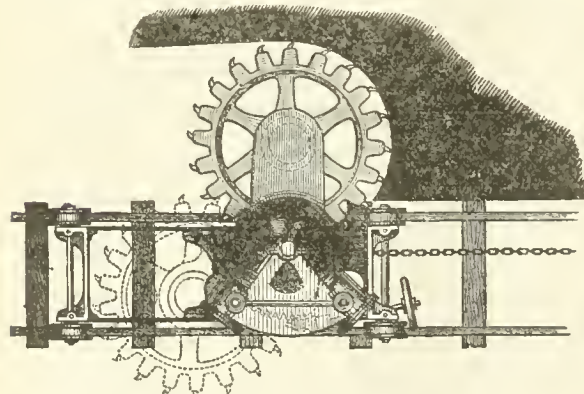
Winstanly & Barker's Coal-cutting Machine—Plan.
